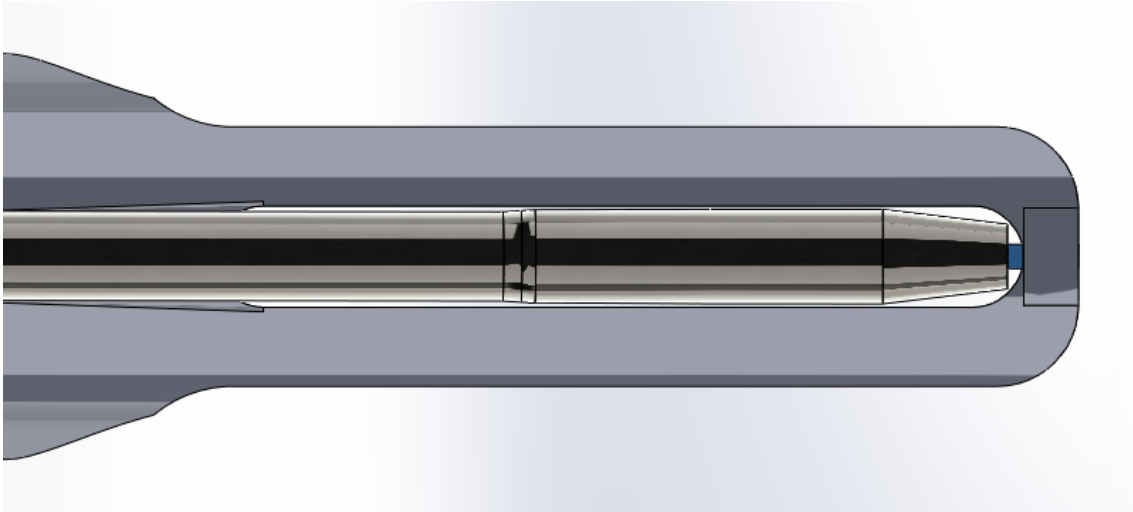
Top view of the adjusted jaw with integrated Eagle Eye Platinum ST catheter, mounted on a guidewire.
